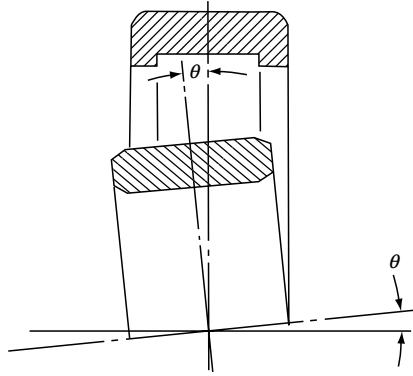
Misalignment of cylindrical roller bearing rings.
